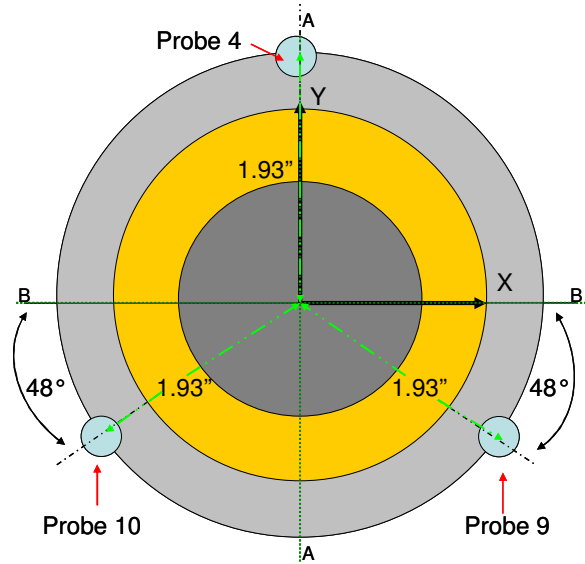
Layout geometry of eddy current sensors on the slave thrust bearing support
